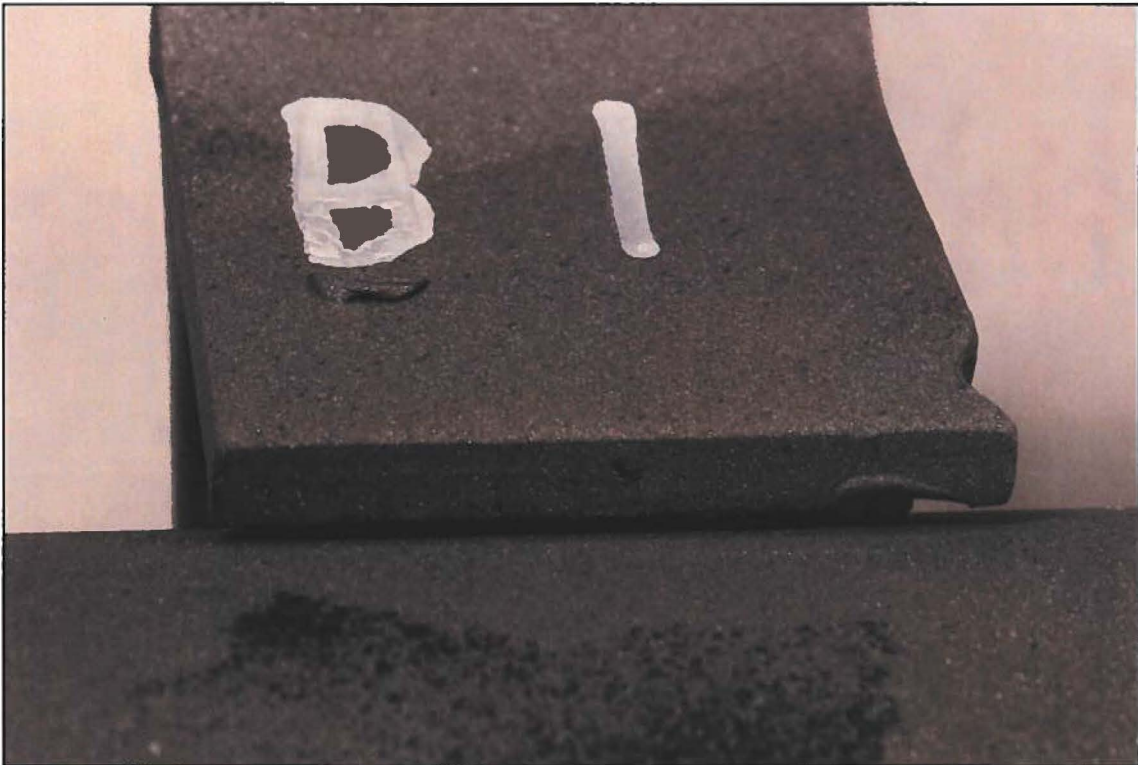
The exterior bottom location of Lug B1 was not welded.
